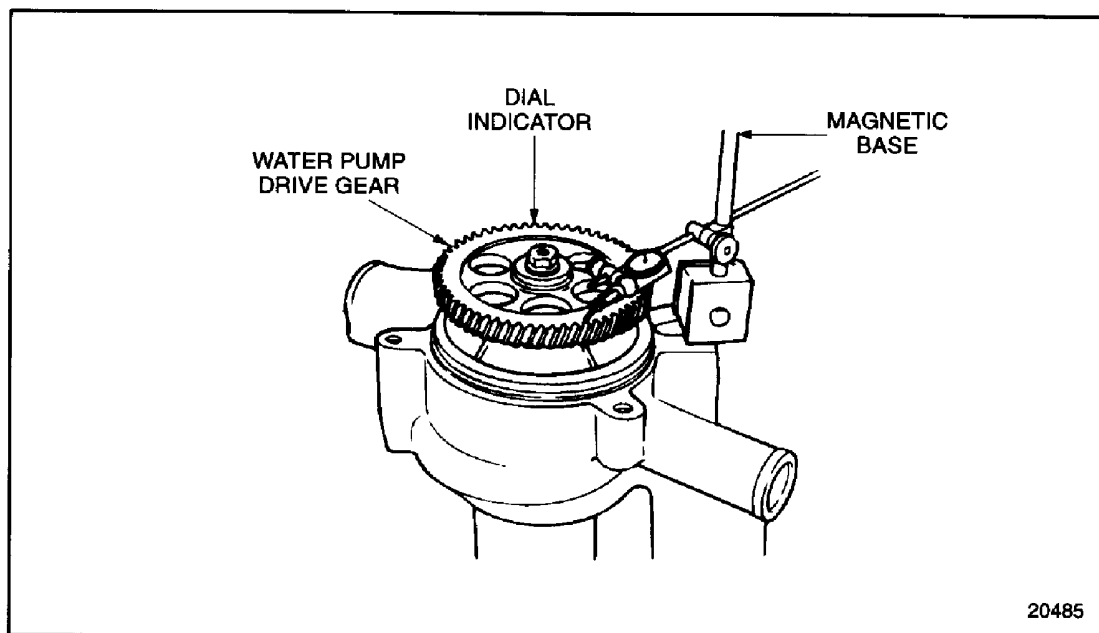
Measuring Water Pump Drive Gear Runout (GCM)
